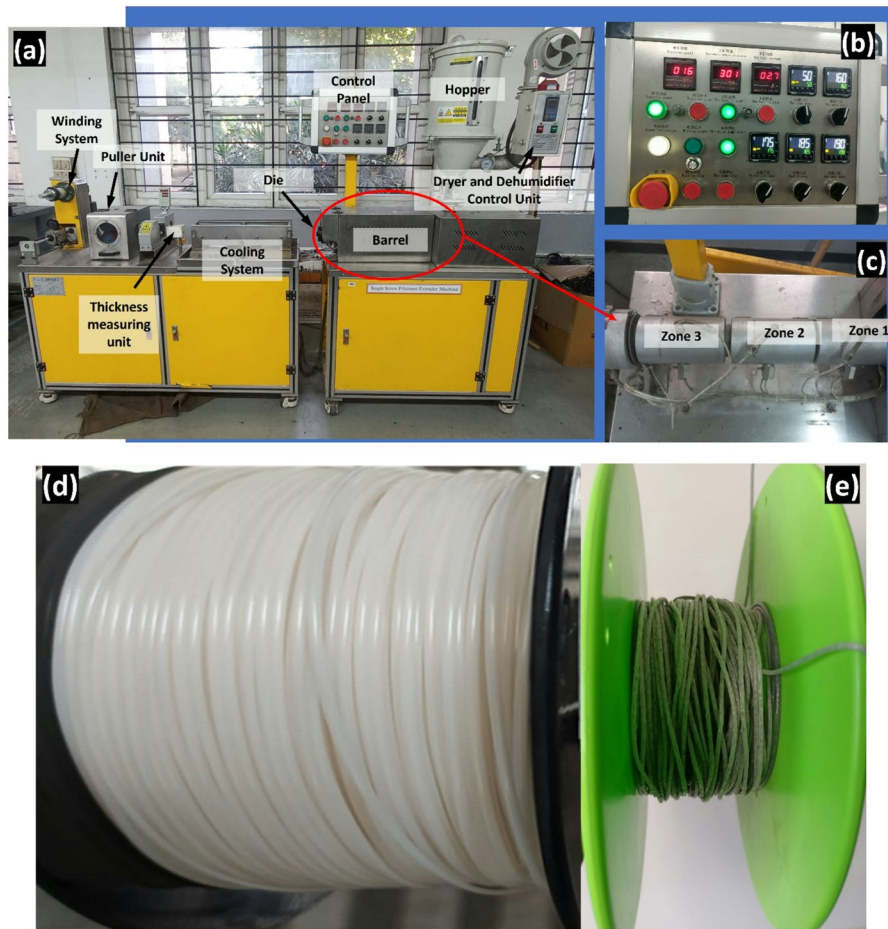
Single screw extruder machine for fabricating TPU and aluminium/TPU samples: (a) full view of the machine set up, (b) control panel displays temperature and screw speed settings, (c) heating zones (zones 1, 2, 3 and 4), (d) pure TPU filament, and (e) aluminium/TPU composite filament
